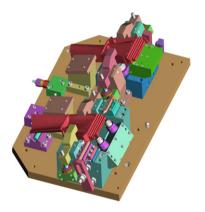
Grind fixture for turbine blades (aerocad design, inc.) [20].
